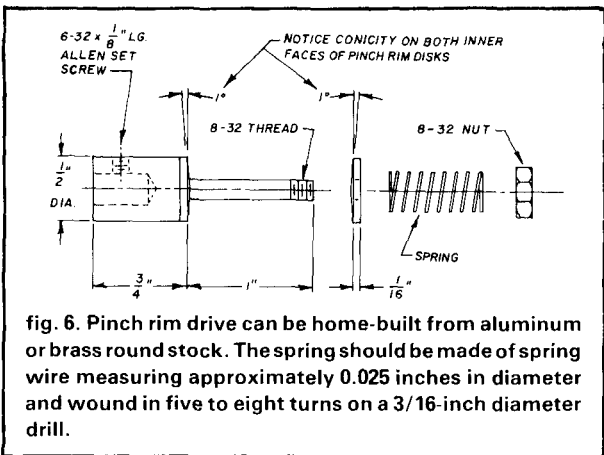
Pinch rim drive can be home-built from aluminum or brass round stock. The spring should be made of spring wire measuring approximately 0.025 inches in diameter and wound in five to eight turns on a 3/16-inch diameter drill.
